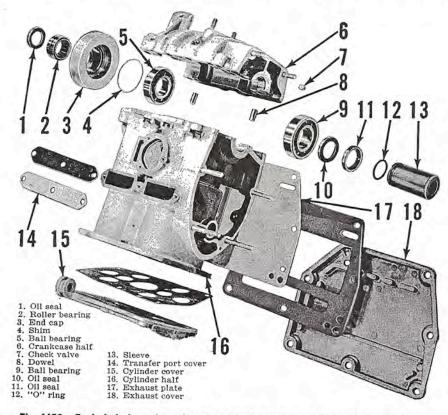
Exploded view of crankcase and associated parts used on late models.
